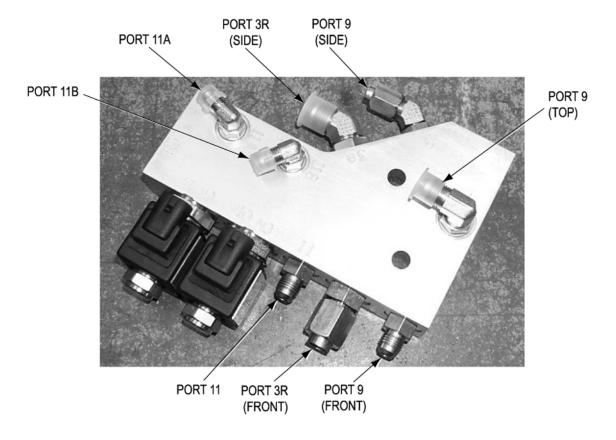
Identification of Forward Right Manifold Assembly ports
